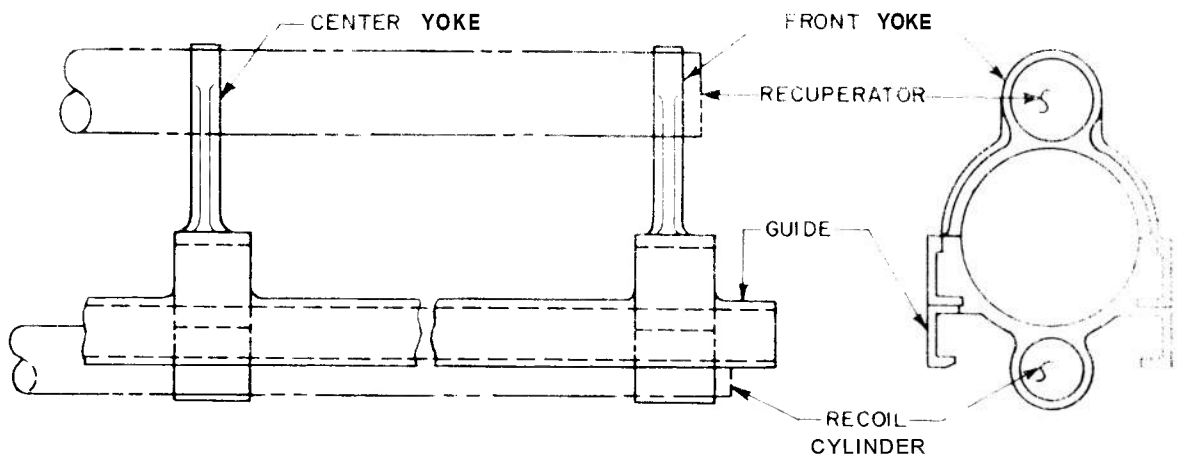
Sleigh With Attached Recoil Cylinders, Gun Tube Secured With Yokes
